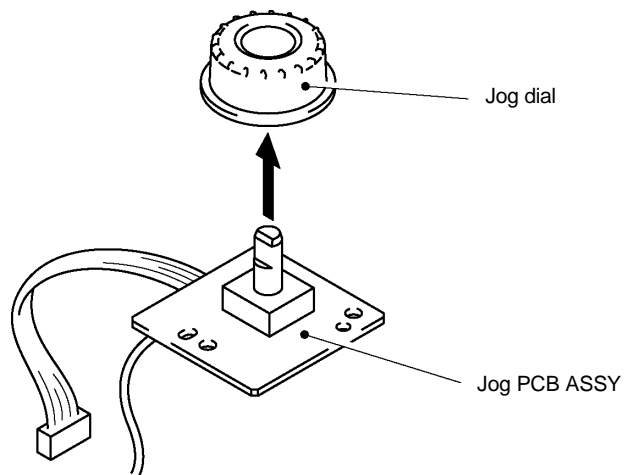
Disassembling the KB Unit/Rubber Key Unit (3)
